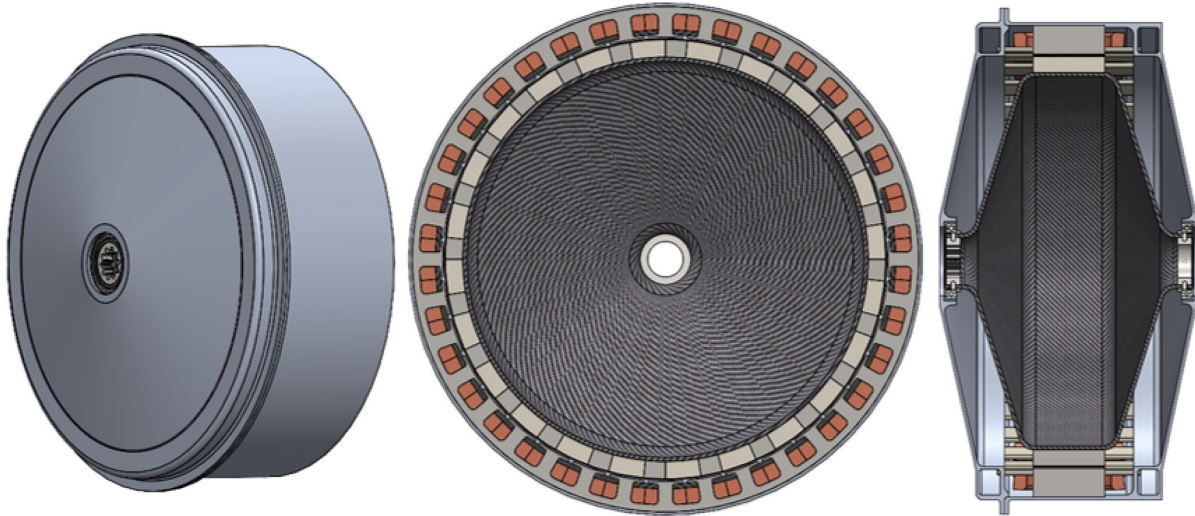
Preliminary CAD of the Chosen Flux-Focusing Motor with Carbon Fiber Shaft.
